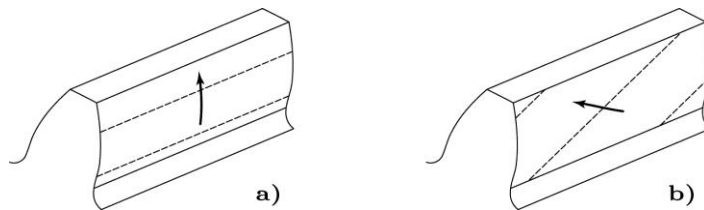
Path of contact lines for a) spur gears, b) helical gears.
